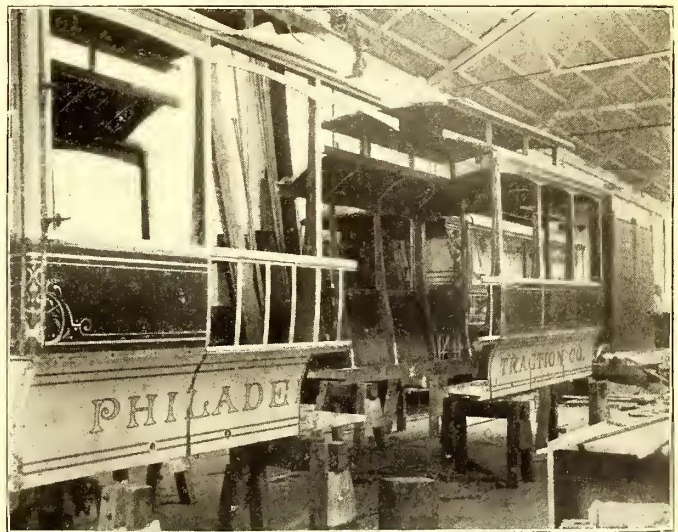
TWO HALVES OF BODY DRAWN APART, READY FOR SILL INSERTION
